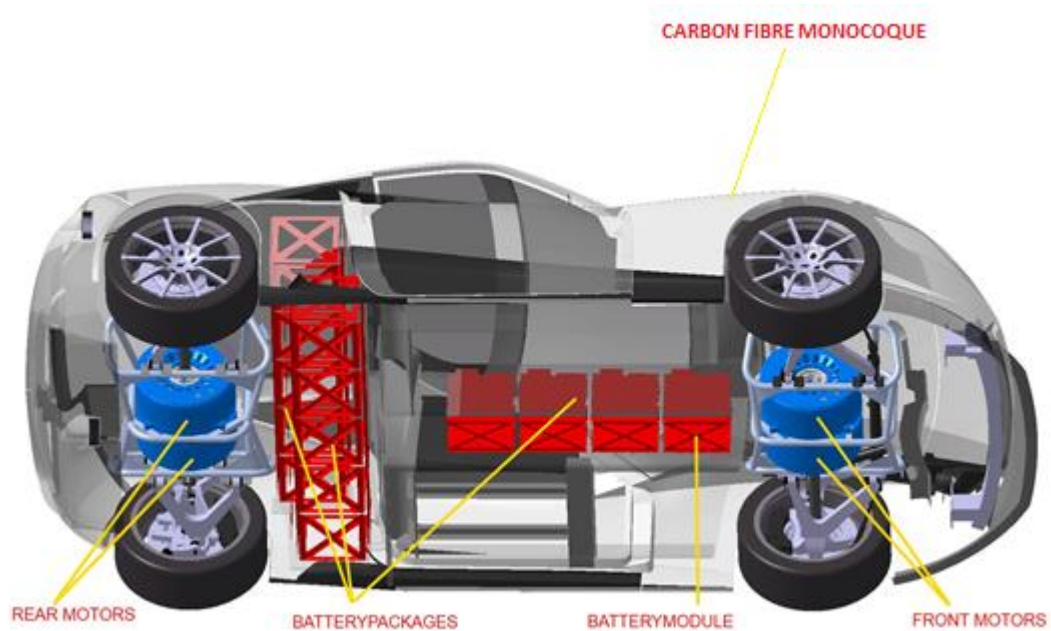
A cross-section view of the component layout in Electric RaceAbout.
